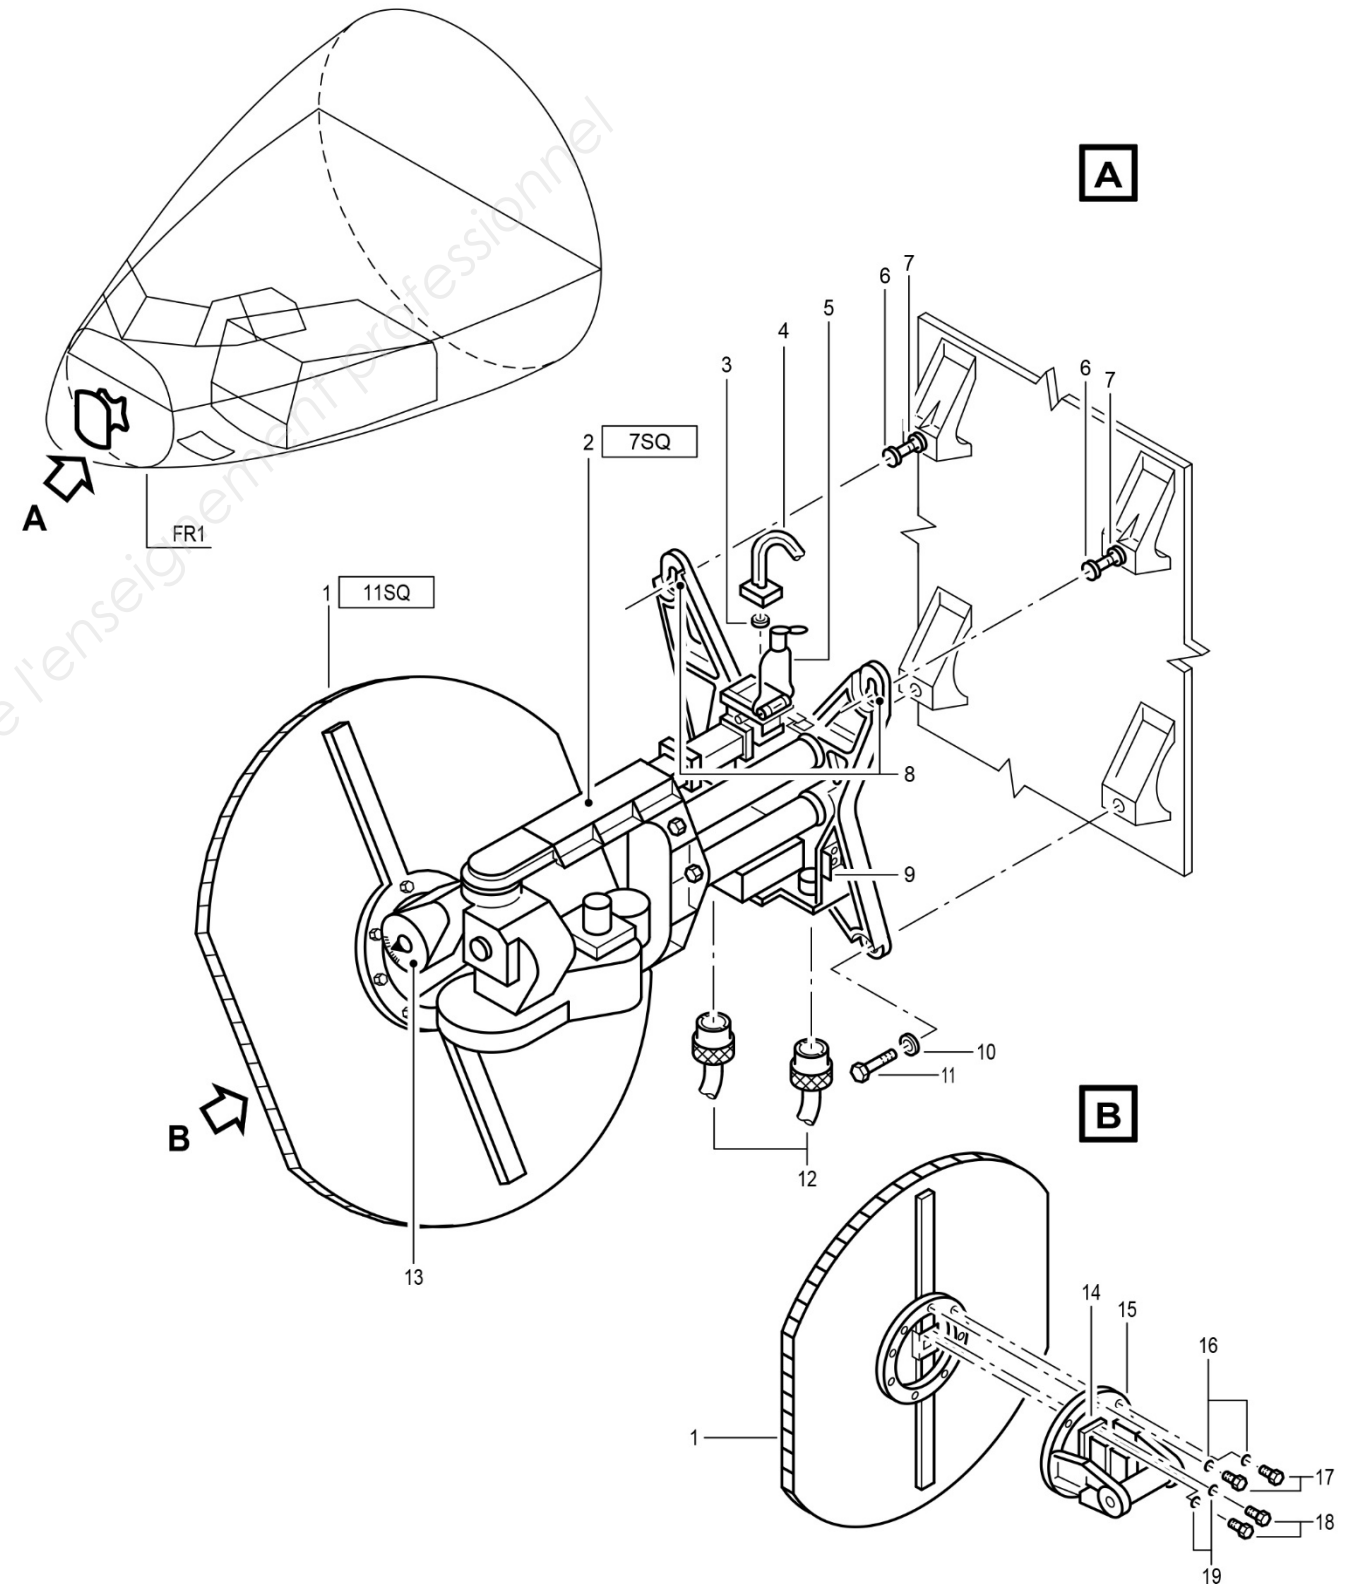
A / SHEET 1/1 - Weather Radar Antenna Assembly
